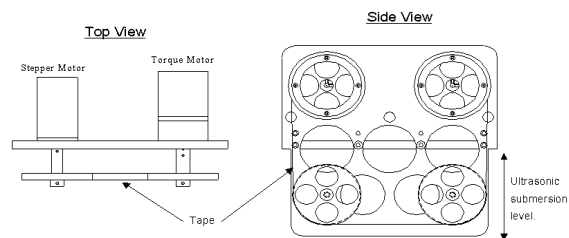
Drawing of the equipment used for cleaning as-rolled metal tape.
